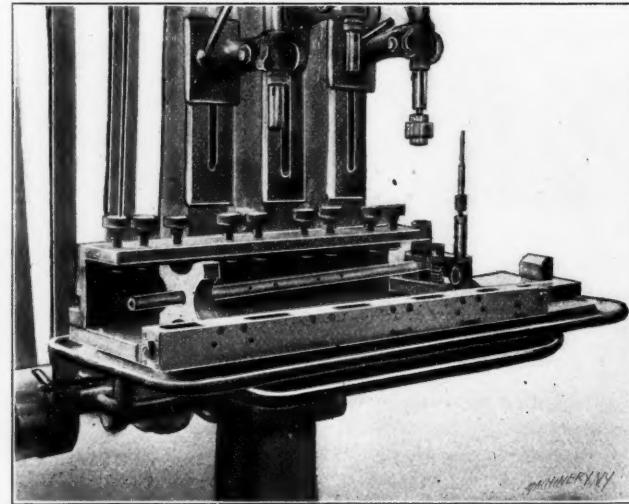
Fixtures for Drilling and Reaming Cam-shafts
